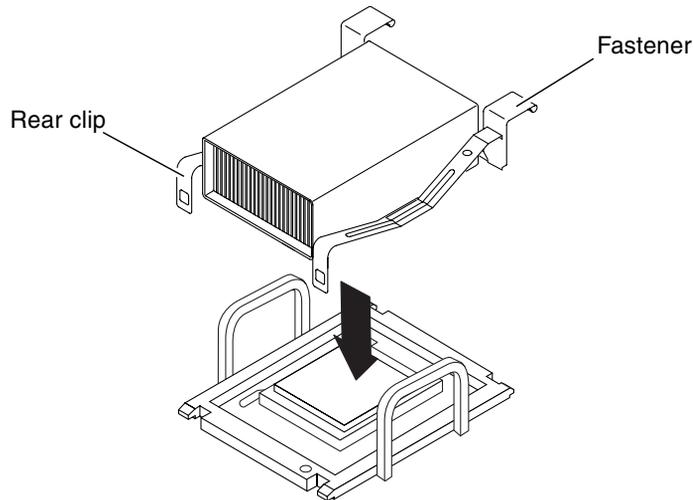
Replacing the Heat Sink on the CPU Socket
